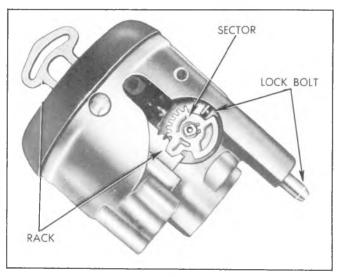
B-81-Installing Lock Bolt and Rack Assemblies
